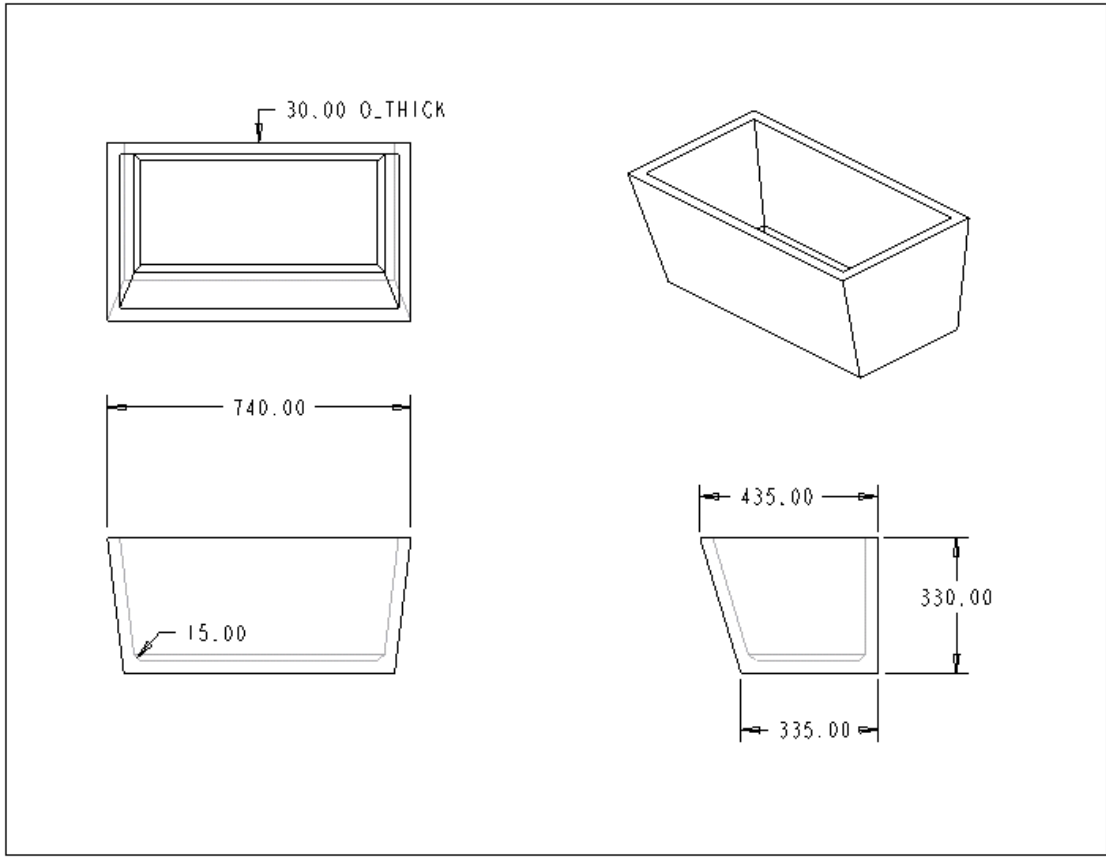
50 to 60 litre ROCLA concrete tank (roof tank)
